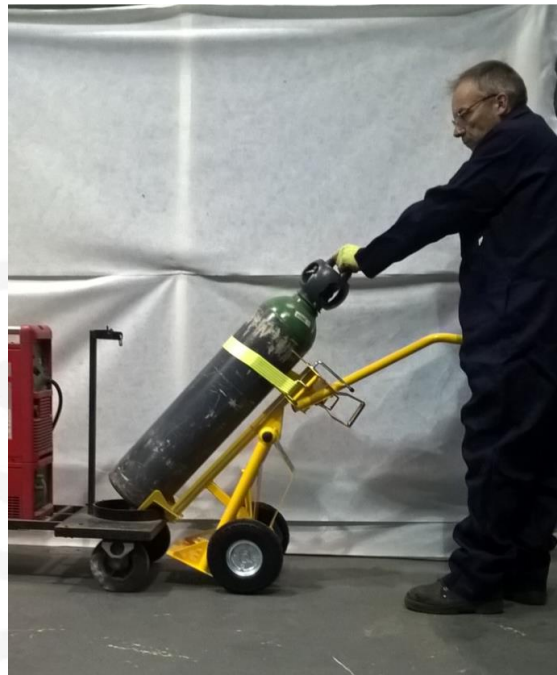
Loading of the 63 kg cylinder using the Cylinder Lifter onto a welding set platform
